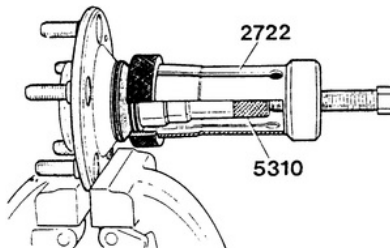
Removing the outer bearing race from the hub using drift 2725 or equivalent
